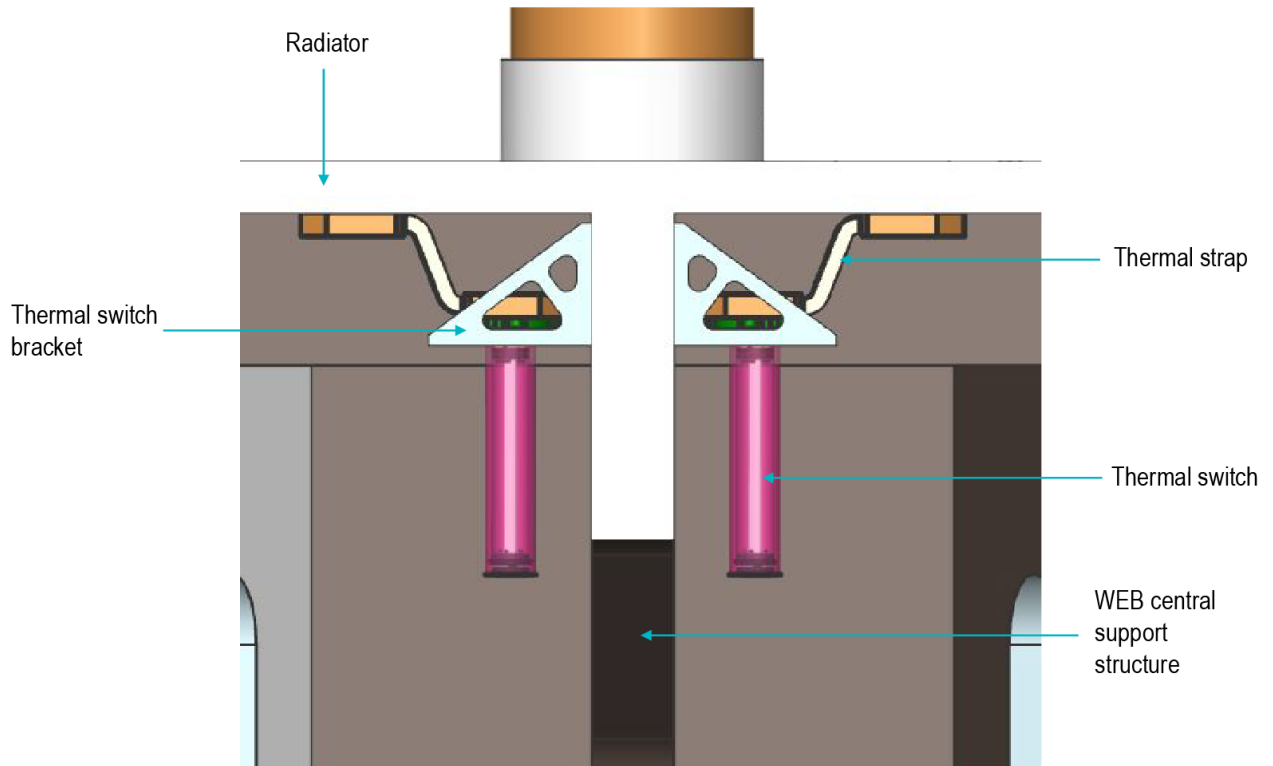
Rear cross-sectional close-up view showing the thermal switches.
